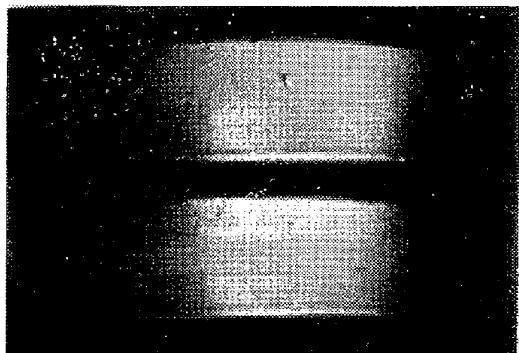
Macro fissure marks appeared in parts of bend specimen.
